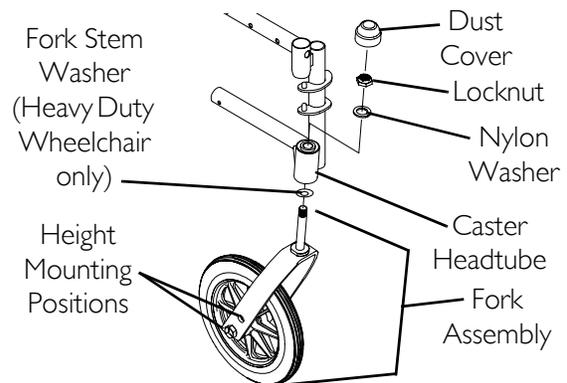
Installing/Replacing/Adjusting Front Casters and Forks
